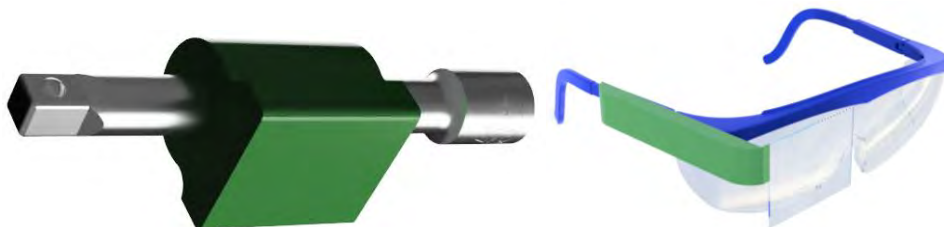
3/8th inch Shaft Electronics Housing (left) & Heads-up Display Housing (right)
